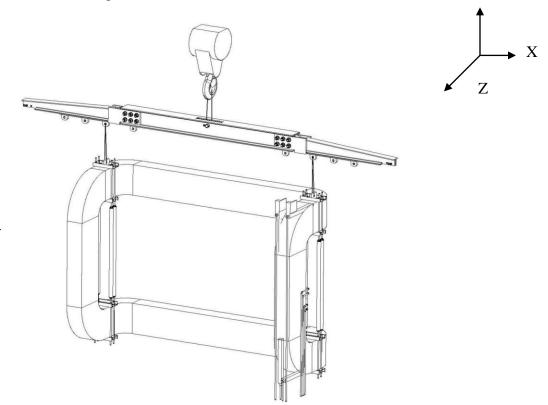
Using the coil insert lifting fixture to lift the coil vertically
